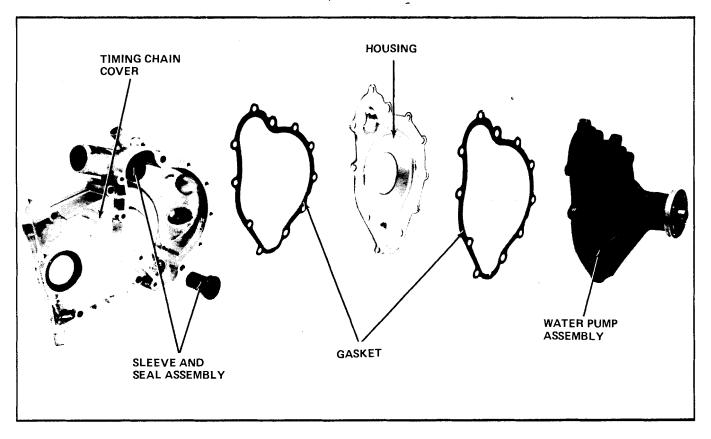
A-7 Water Pump Assembly & Timing Chain Cover (V-8 Except 307 V-8)
